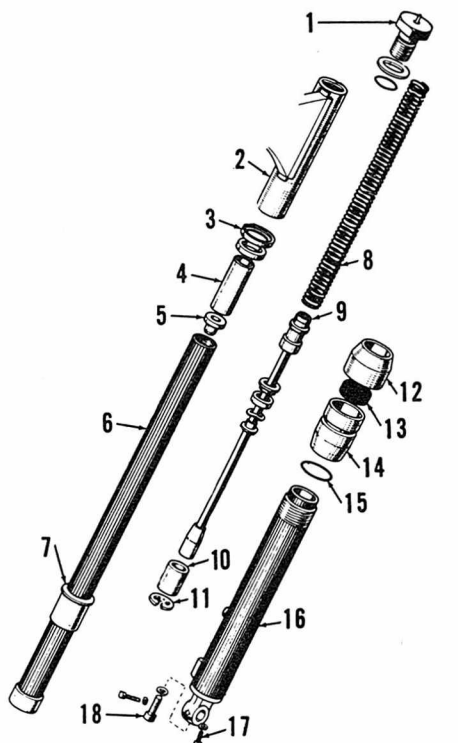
Exploded view of F4 front suspension unit. Later F3 versions are similar.
